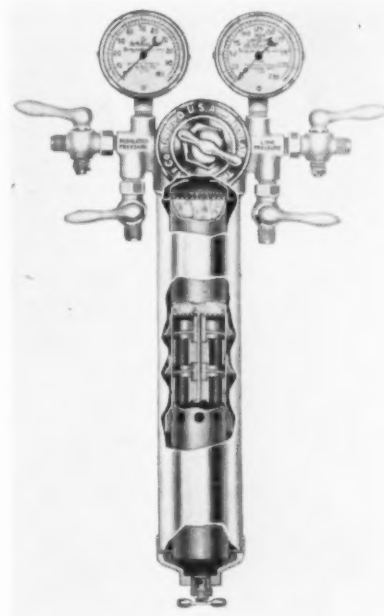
Cut-away view of transformer showing arrangement of baffles and replaceable cotton waste filler.
